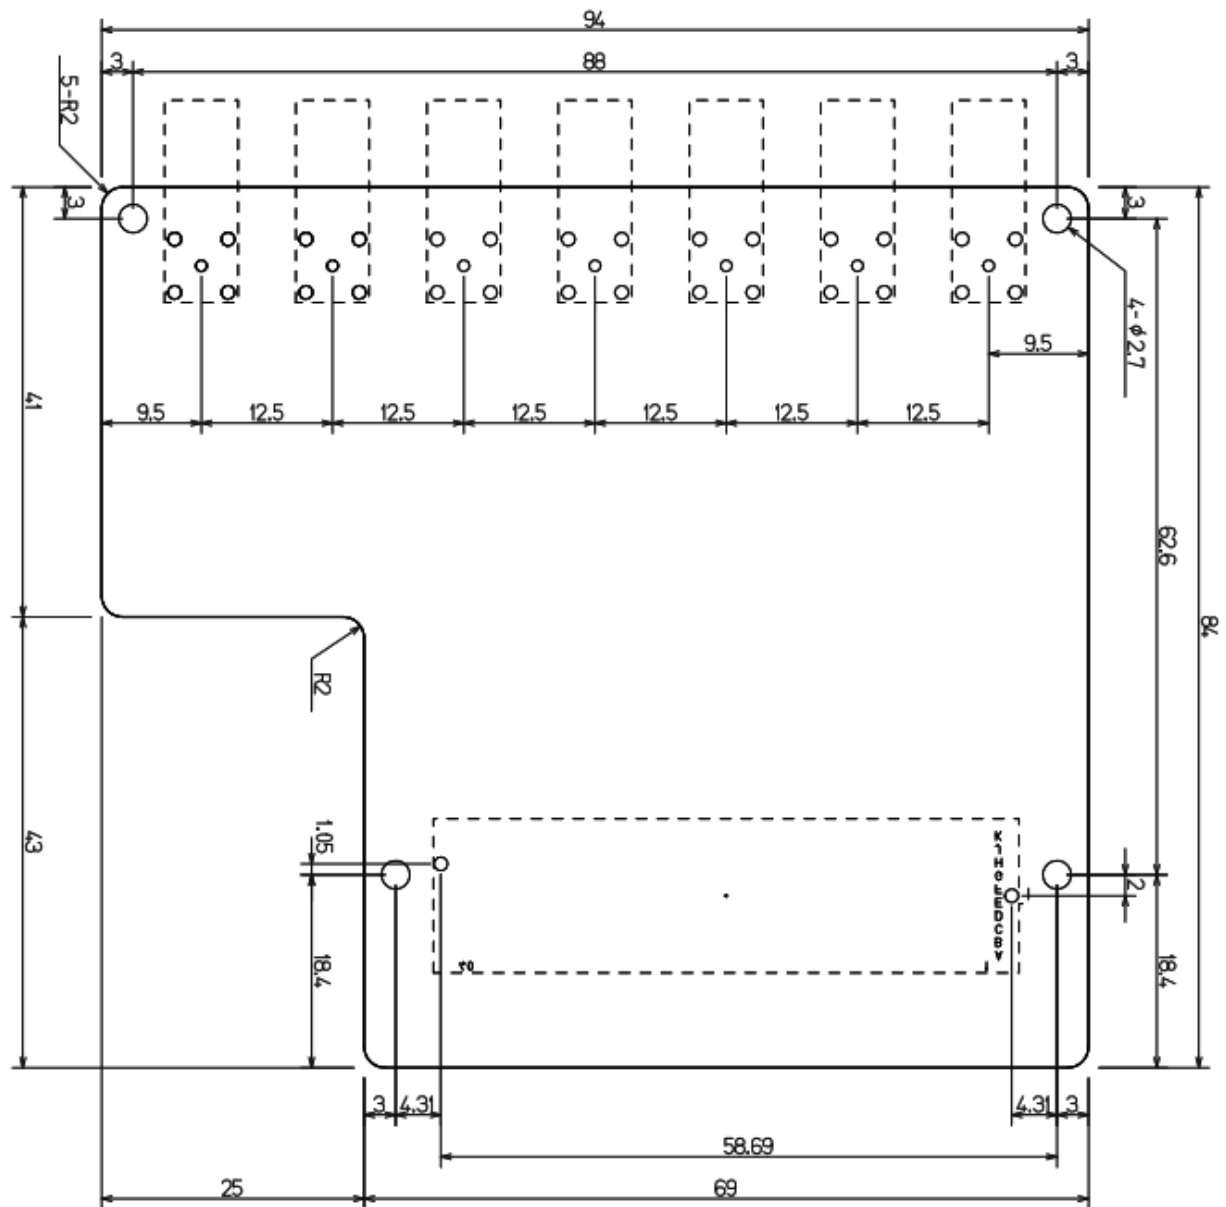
TB-FMCH-3GSDI Board Dimensions
